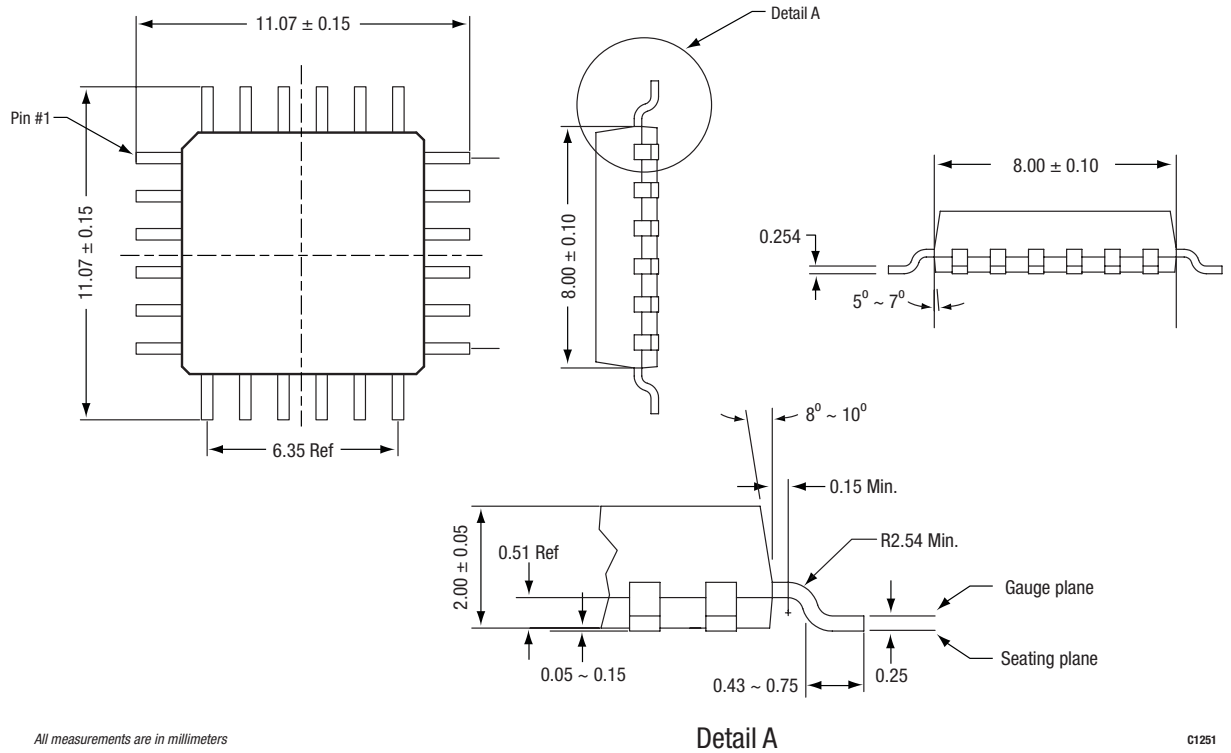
SKY42053 24-Pin PQFP Package Dimensions
